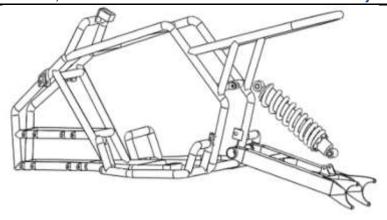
Exploded view of ATV chassis, swingarm and the suspension.
